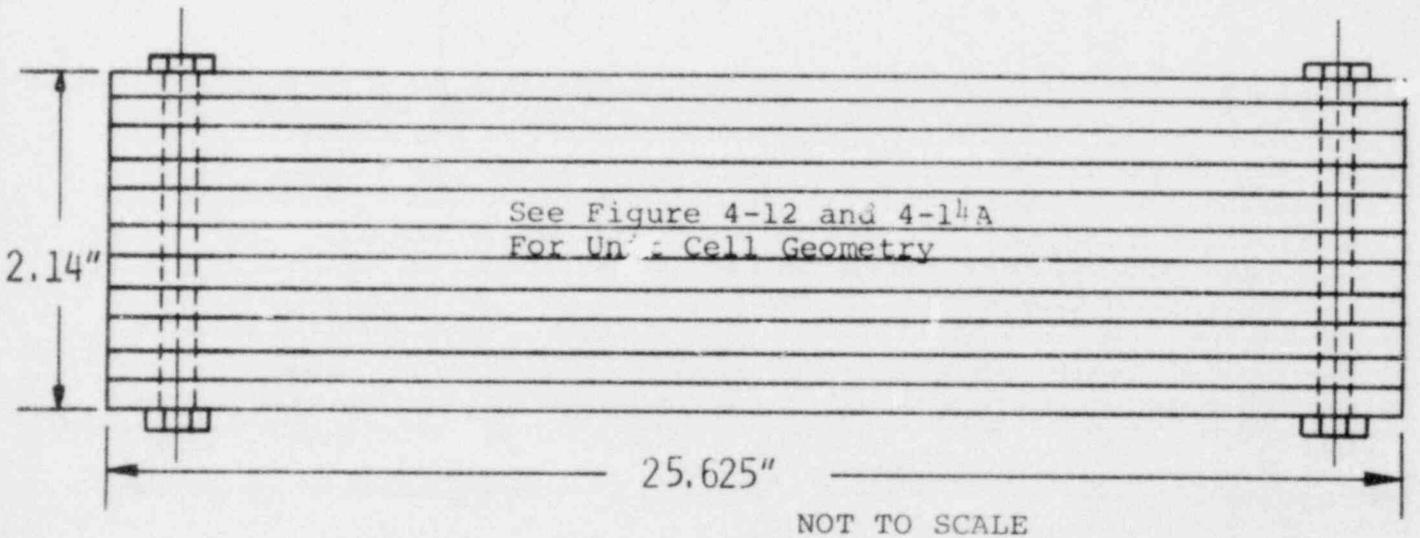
UFTR Fuel Plate and Fuel Bundle Geometric Arrangement.
